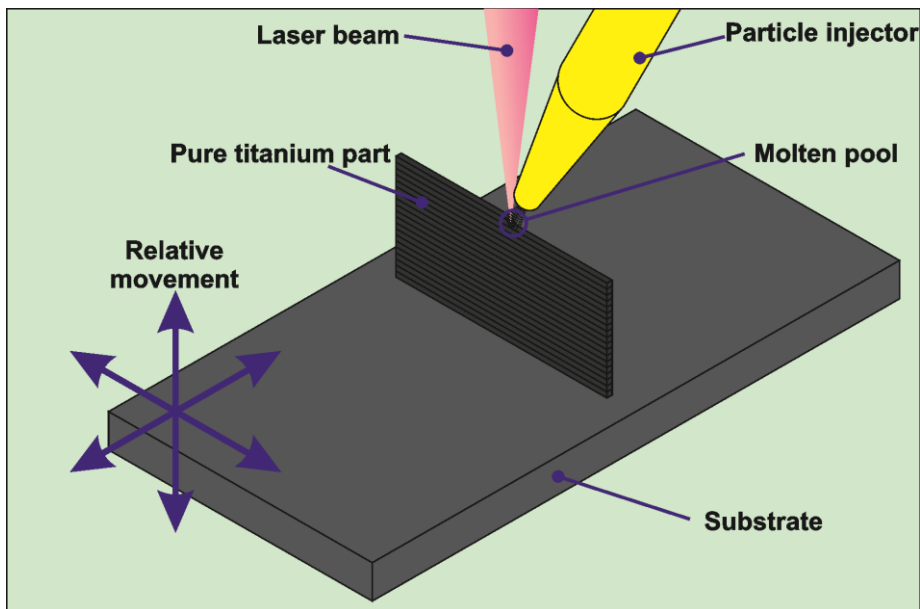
Sketch of Rapid Prototyping based on Laser Cladding technique with side particle injection.
